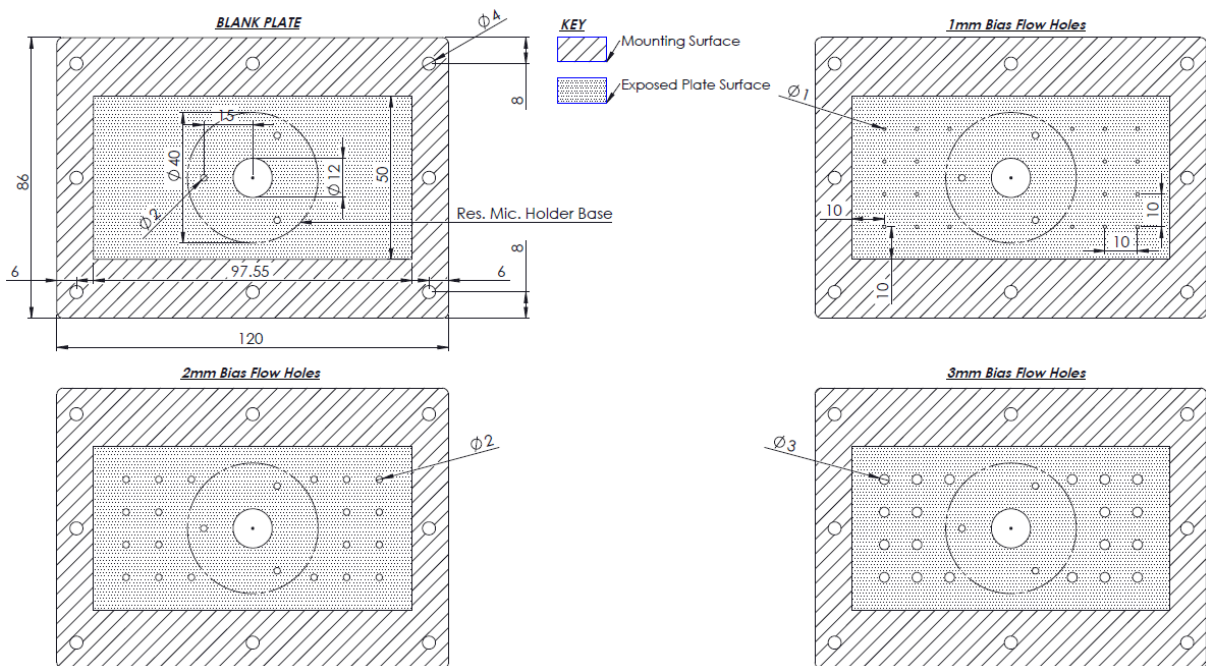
Schematic engineering drawing showing outer plate design requirements
